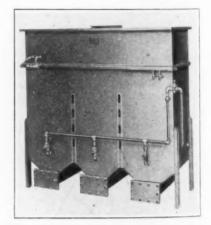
Three dip degreasing machine. (Courtesy G. S. Blakeslee Co.)
